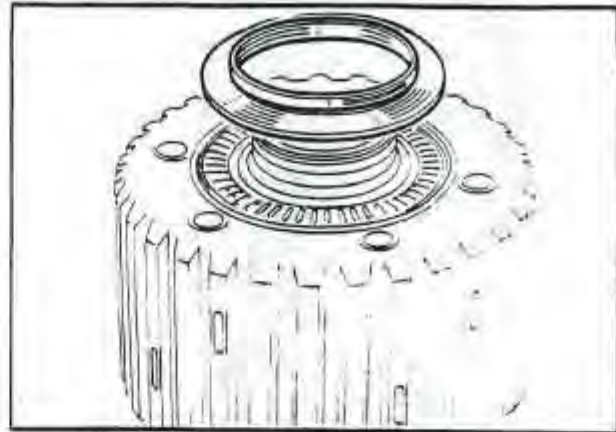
CLUTCH C-1 NEEDLE BEARING
